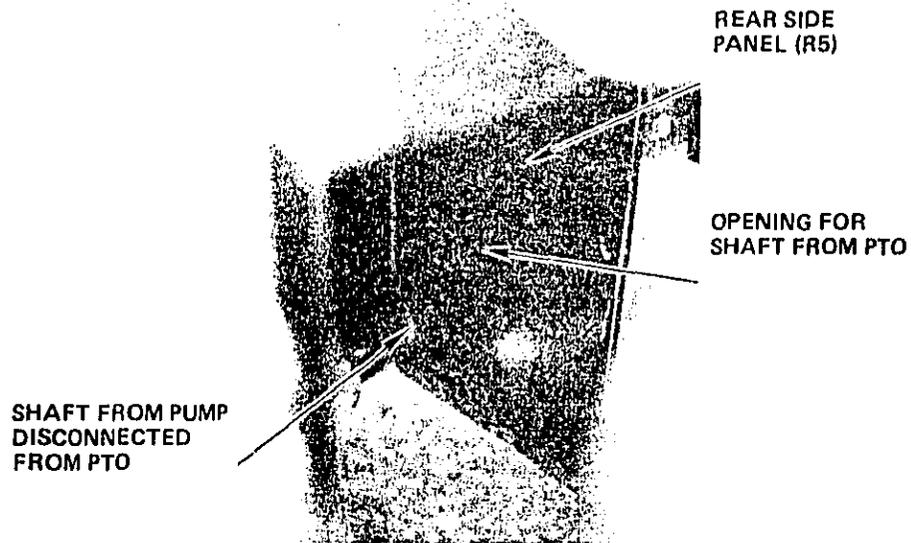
OPENING IN PANEL R5 FOR PTO SHAFT.
